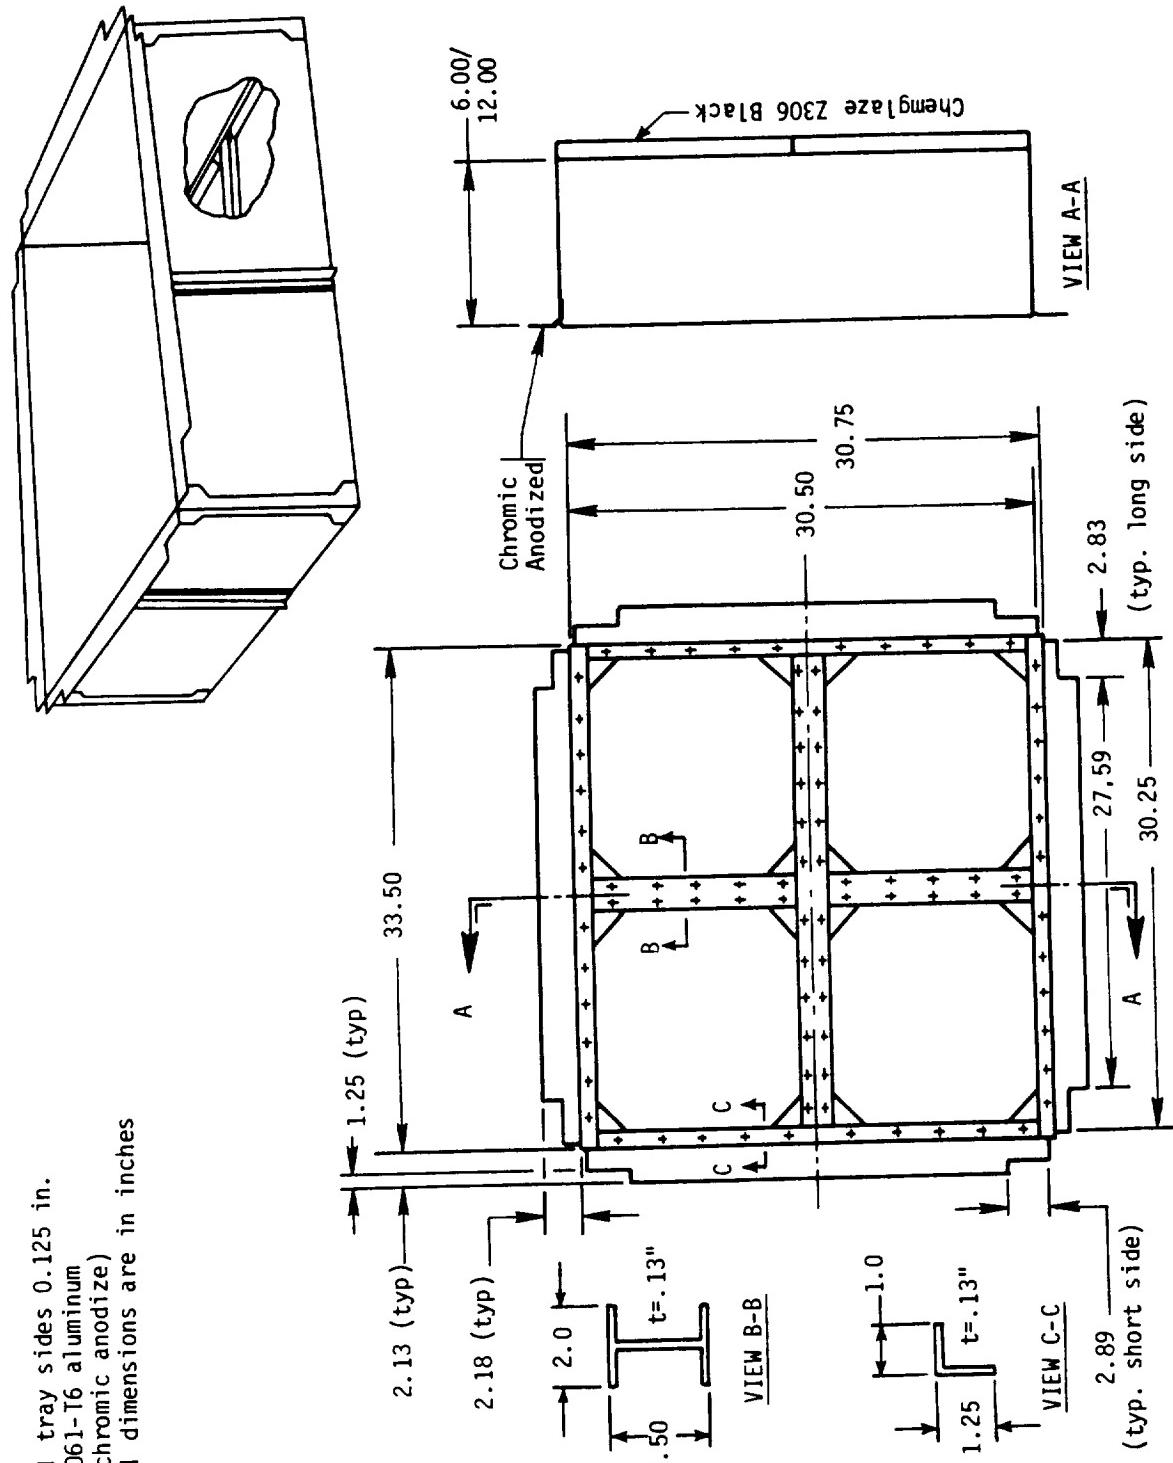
LDEF End "Center" Tray - 6 & 12 Inch Deep
